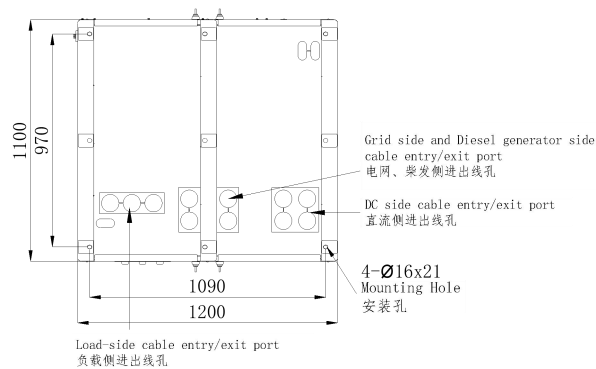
2 Hole positions of the 125KW integrated cabinet
